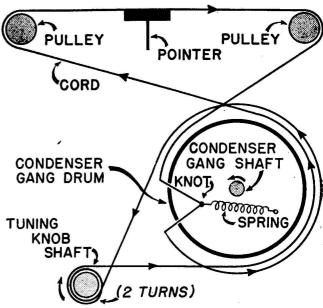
A typical dial-drive system using a cord drive. The condenser gang shaft and the cord move in the direction shown by the arrows when the tuning knob is turned clockwise.
